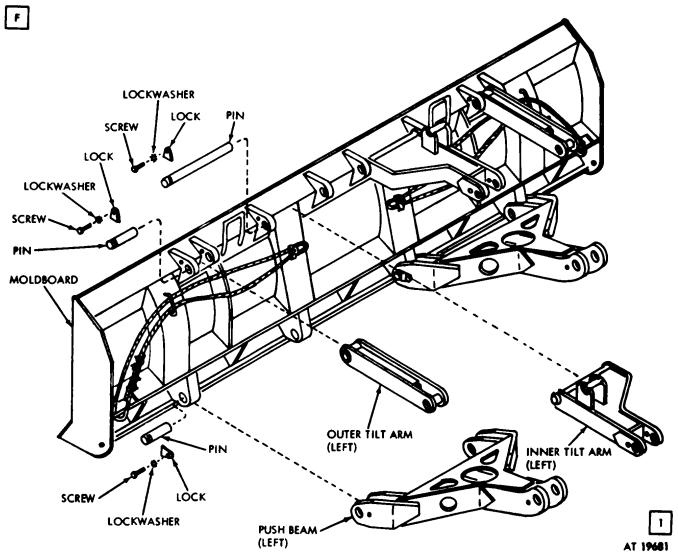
Removal or installation , of moldboard assembly (sheet 4 of 4).
